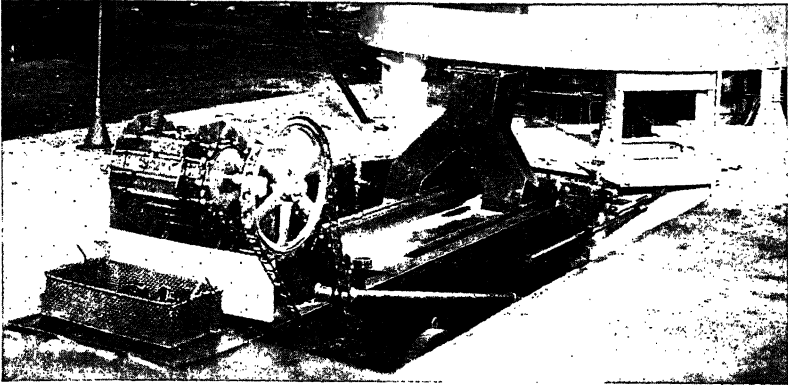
Double quench tank for either oil or water-quenching of pieces heated in a continuous rotating-hearth furnace. Note Y-shaped chute for deflecting pieces to desired bath.
